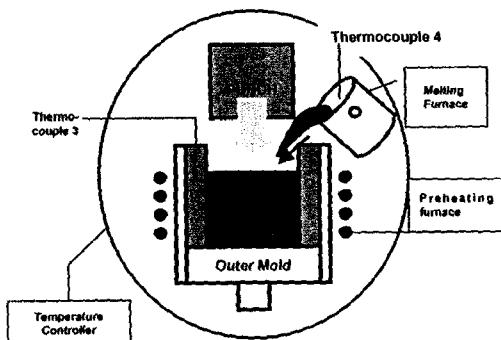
Schematic drawing of vacuum assisted pressure infiltration casting
